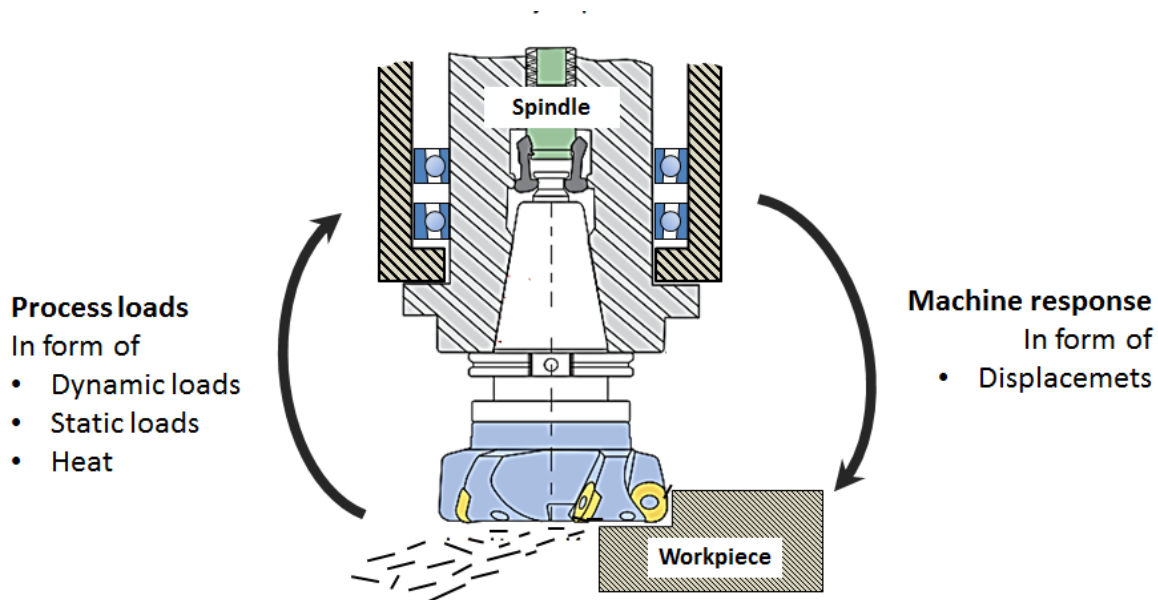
Interaction between process and machine tool. Adapted from (Brecher, et al., 2009)
